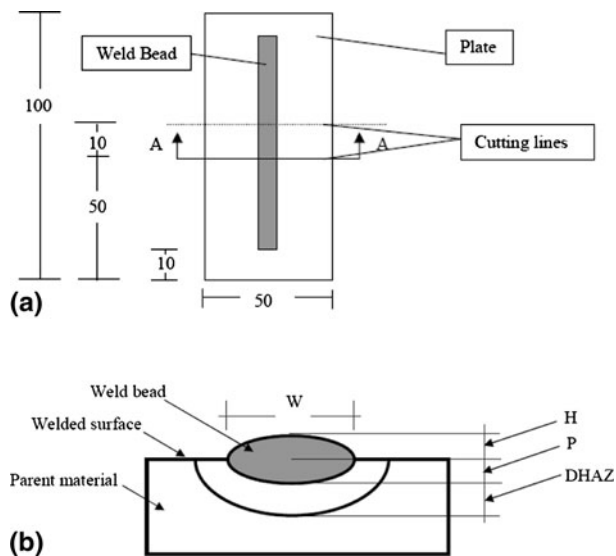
Schematic illustration of (a) bead-on-plate and the section line of the studied specimen, and (b) weld bead geometry elements
